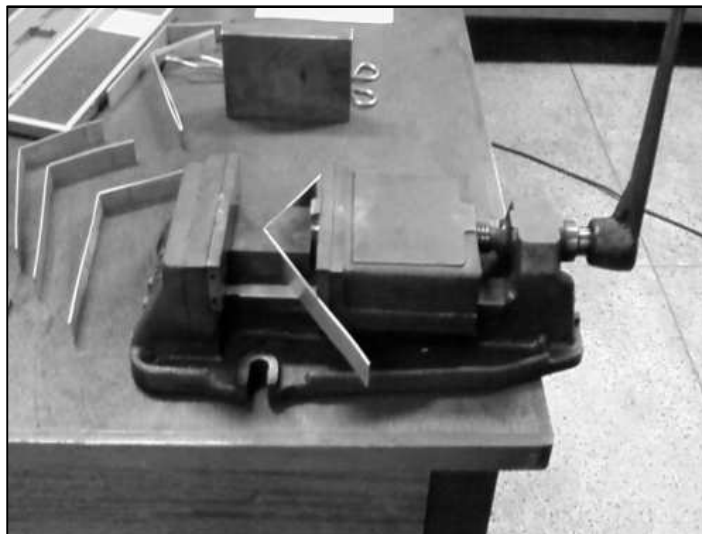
2. Bending apparatus for hot-rolled AZ31B sheet.
